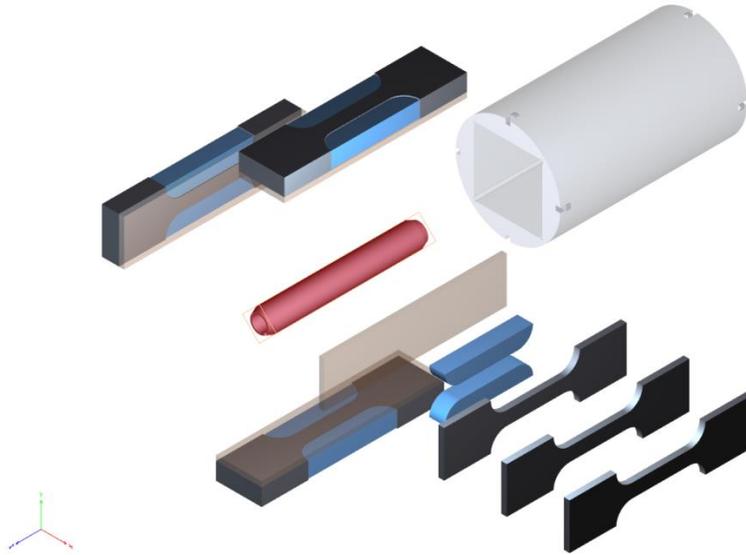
Expanded view of a holder sub-assembly with 12 SSJ2 tensile specimens, chevrons, thermometry liners and steel
